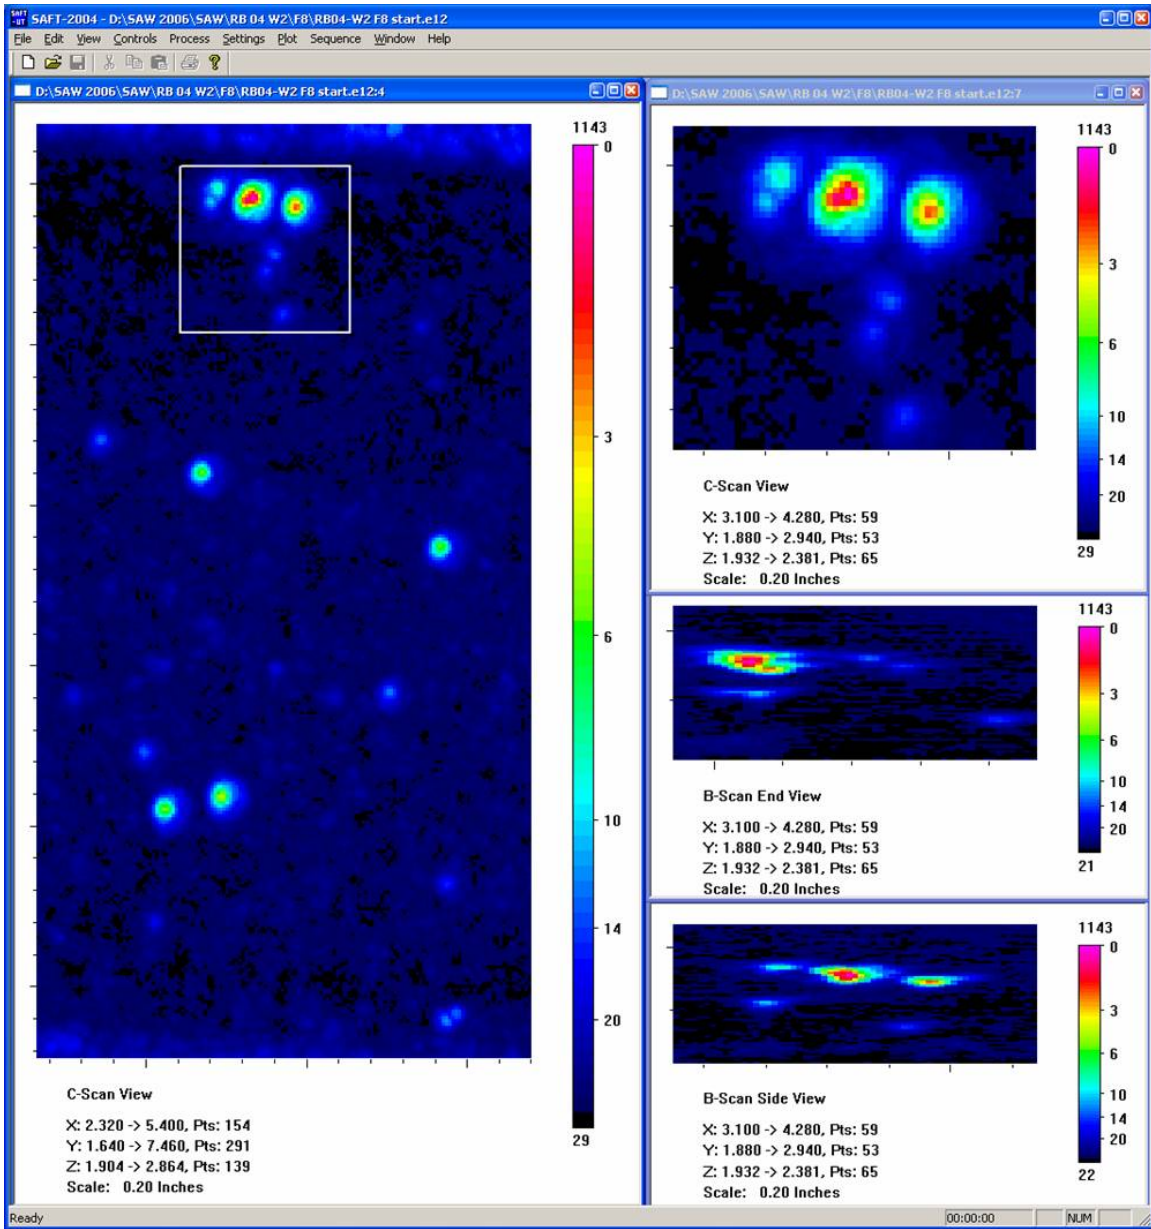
a 10 MHz F8 Immersion Testing Images of Small Fabrication Flaw: *RB3A*. This figure shows immersion testing data of a 6-mm flaw indication from the weld-normal testing of large weld segments. The flaw indication is identified in the box drawn in the SAFT-UT image on the left in the figure.
